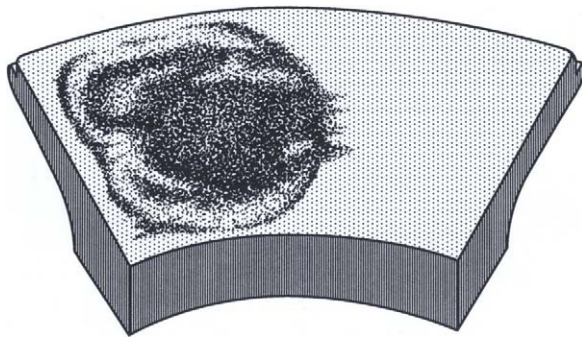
Evidence of overload on a tilt-pad self-equalizing thrust bearing pad (Courtesy of Kingsbury Corp.)
